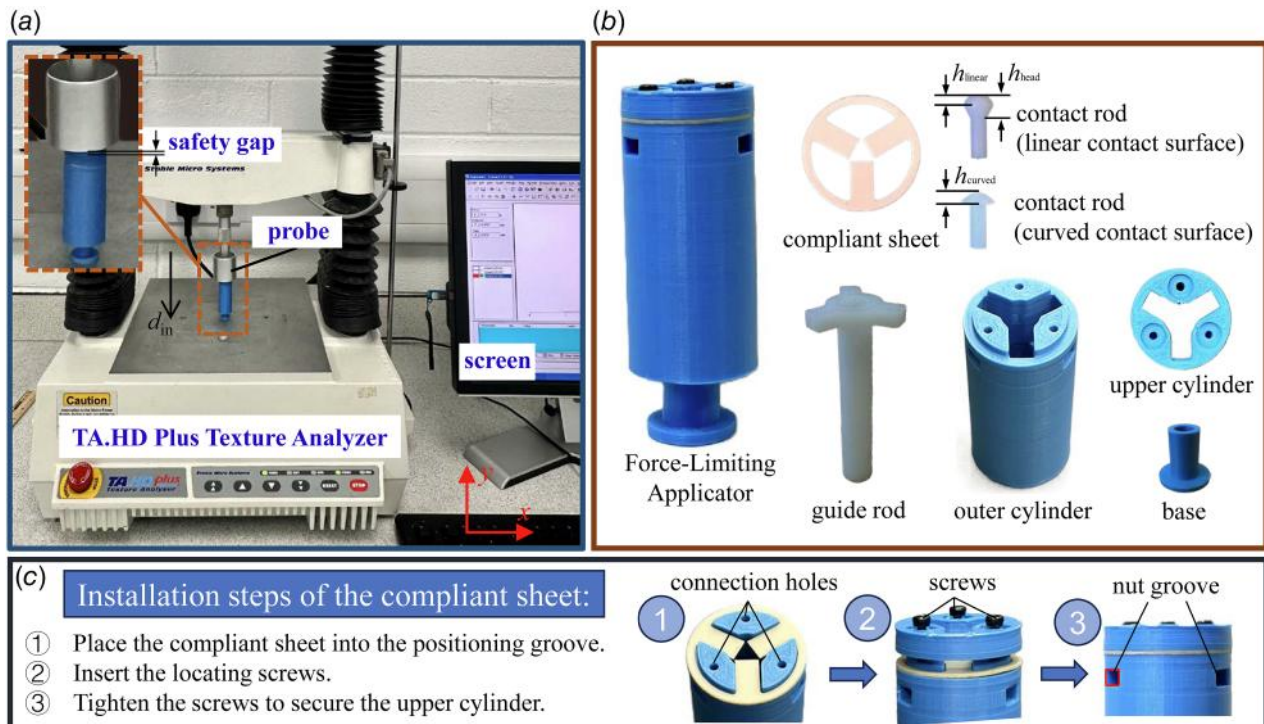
Experimental testing: (a) experimental setup, (b) prototype components, and (c) installation steps
